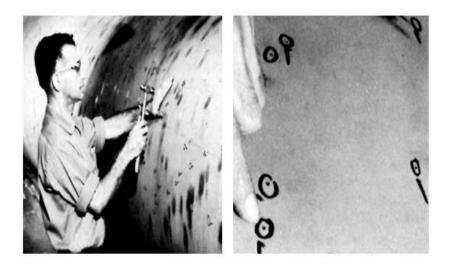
Plugging defects in the surface of a large cast-iron drum.
